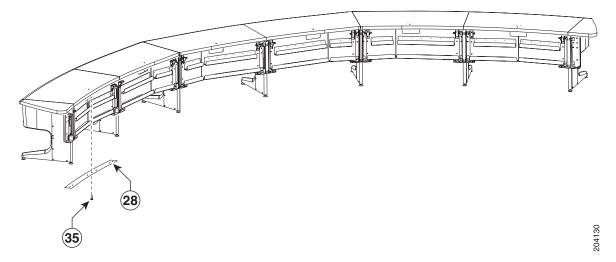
Left Section 5 Privacy Panel Alignment Bracket
